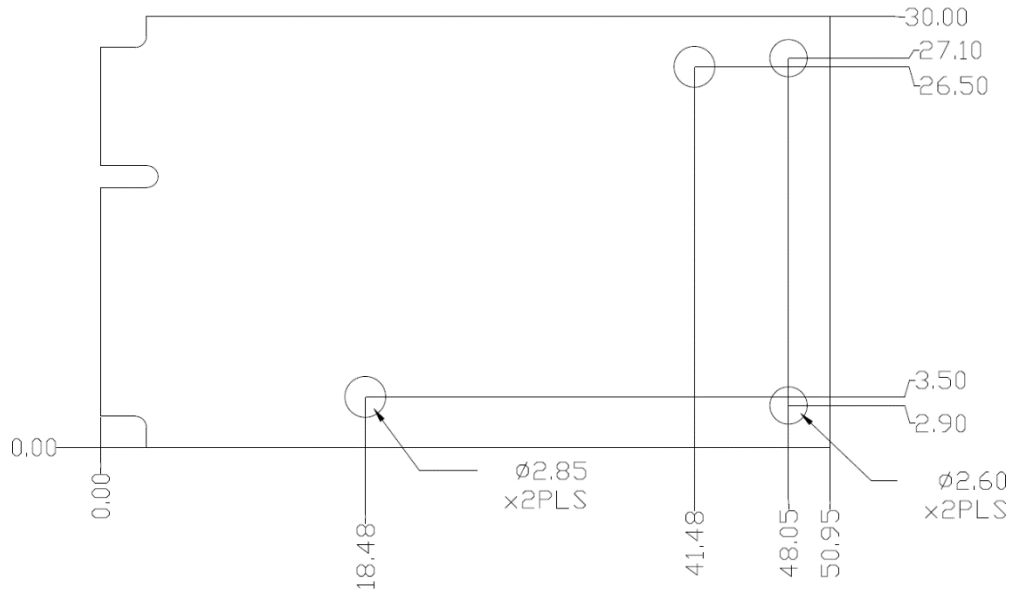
HMP1RB1C2GAMechanical outline – Top View (dimensions in millimeters)
